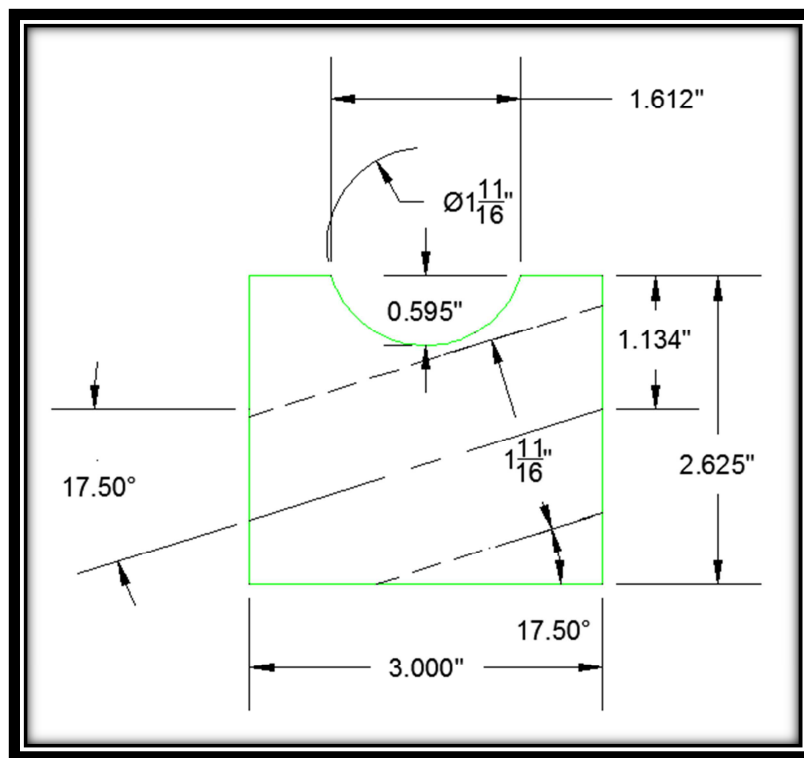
Front Fork – Actuator Receiving Block Dimensions
